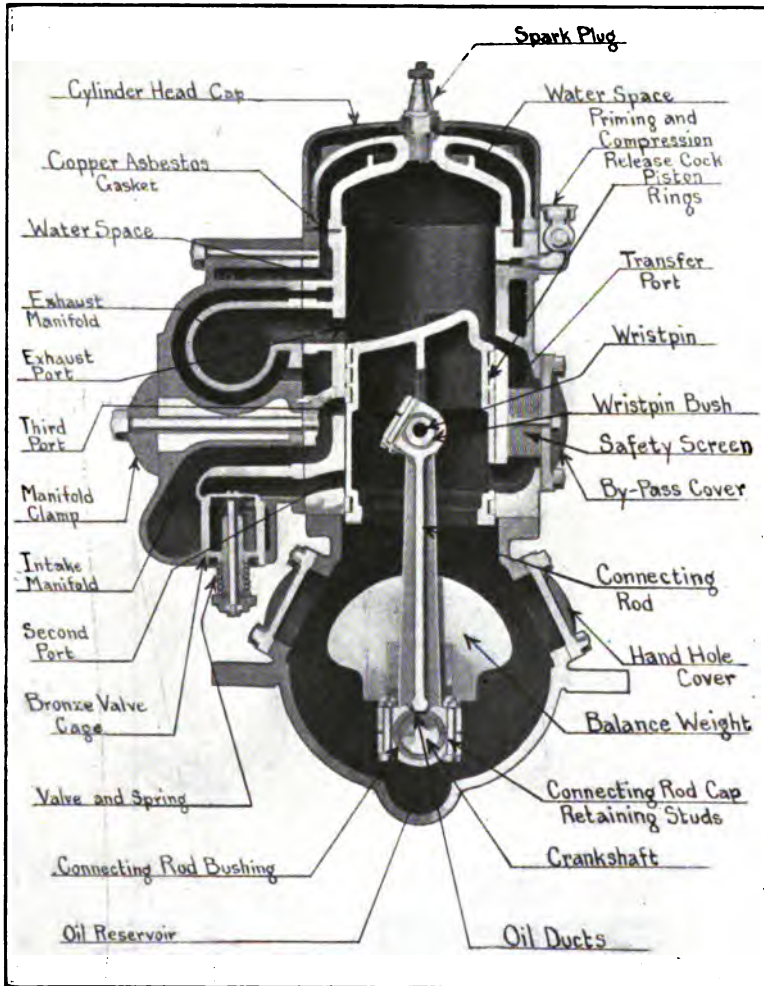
Sectional view showing arrangement of parts in the Gray combined two and three-port Model T engine.
